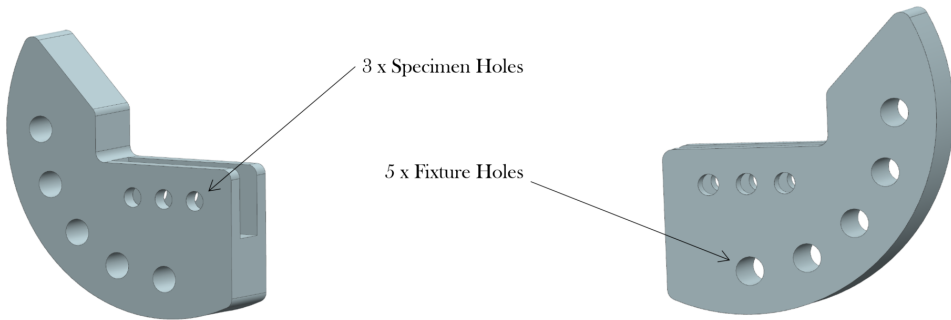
Caption of CTS specimen, CAD model and technical drawing
